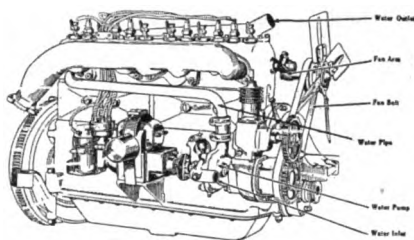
THE PRINCIPAL PARTS OF A PUMP SYSTEM ARE SHOWN INSTALLED ON A SIX CYLINDER CONTINENTAL MOTOR
